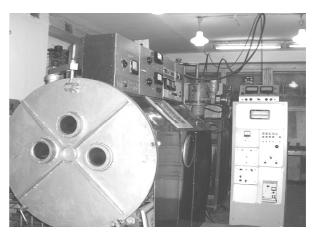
Laboratory equipment for electron beam vacuum welding and surfacing
